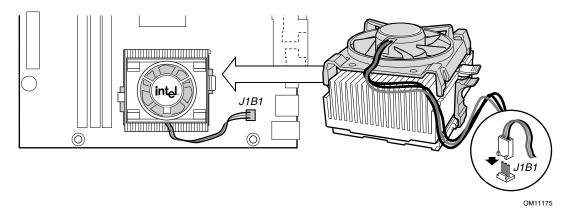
Connecting the Processor Fan Cable to the Processor Fan Connector
